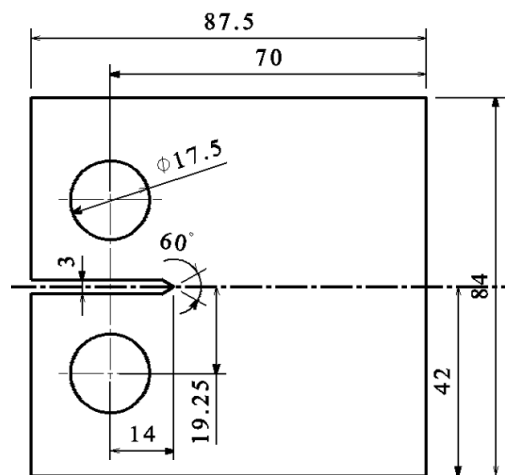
Geometry and dimension of WAAM build C(T) specimen (unit: mm)
